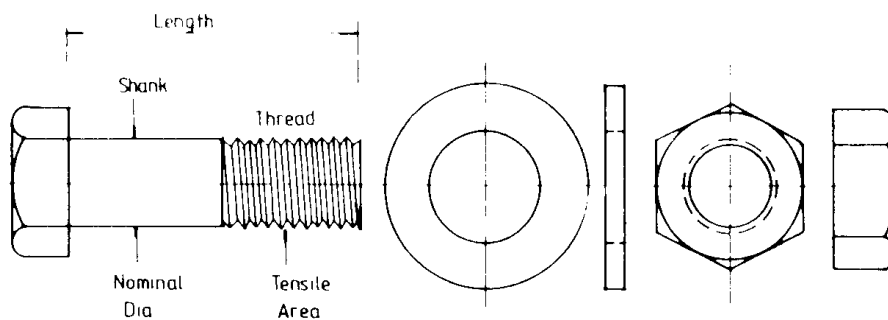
Hexagon head bolt, nut and washer (extracted from ref. 6)
